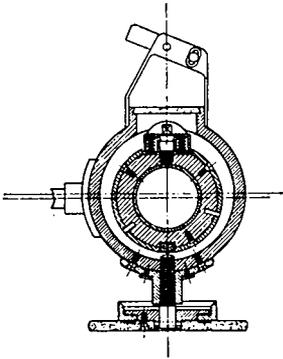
Section of assembly at C—C (indicated in Fig. 3), showing micrometer screw.
